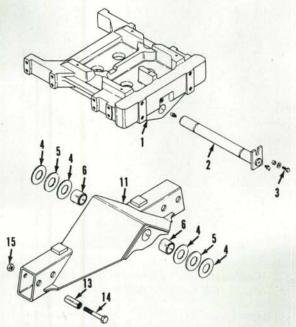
Exploded view of front axle and support used on two-wheel drive models.
